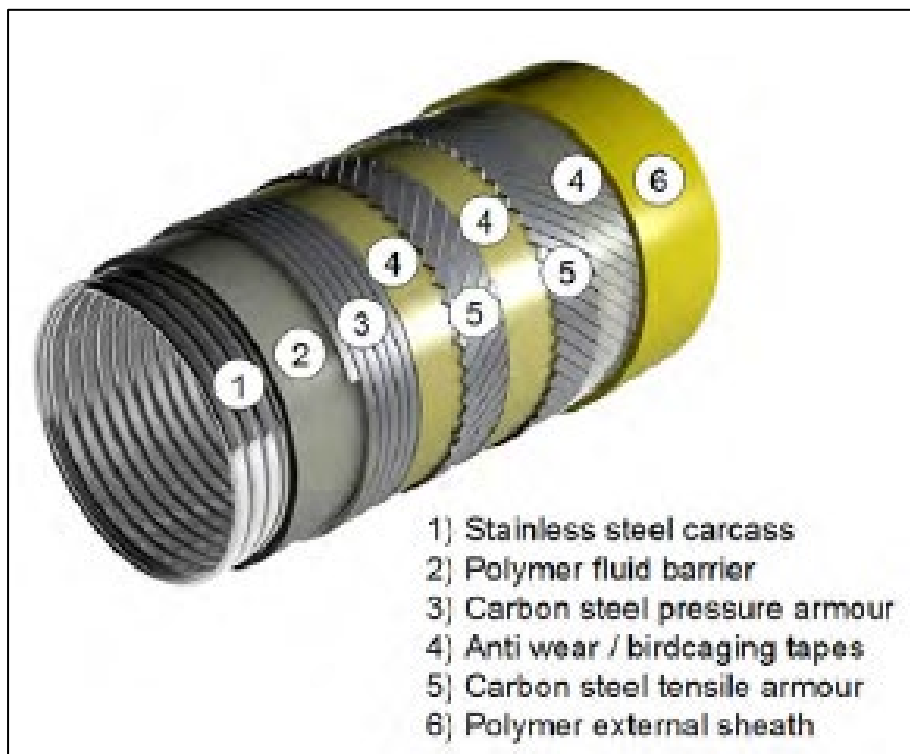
Typical cross section of an unbonded flexible pipe. Courtesy of Handbook on Design and Operation of Flexible Pipes 2017.
